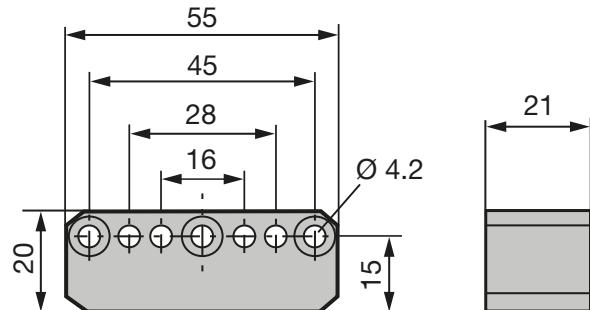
Installation dimensions of BTL5-P-5500-2 magnet
